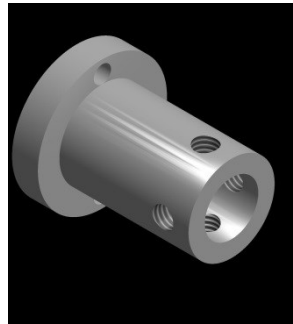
Motor shaft connector. This component connects the platform chassis and pattern clip to the stepper motor shaft.
